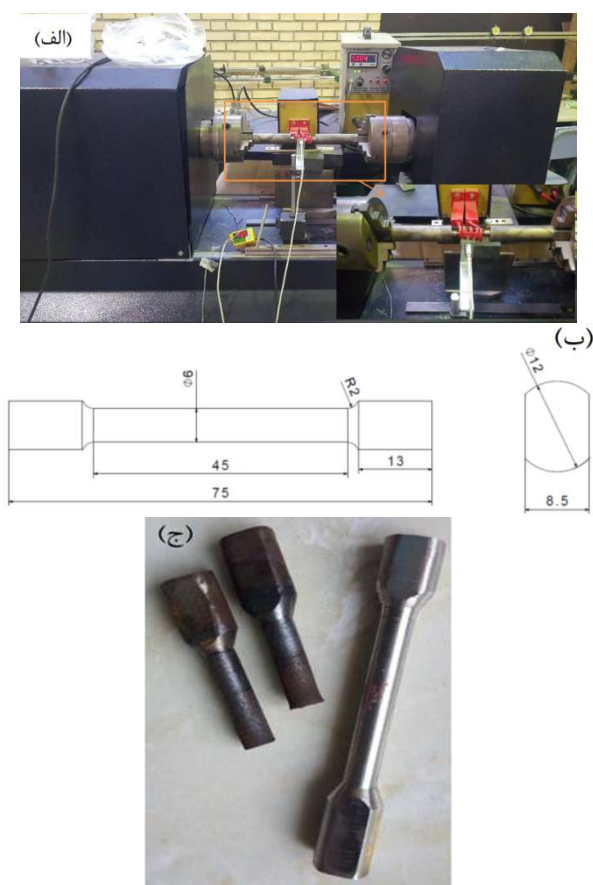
Experimental set-up. (a) Test machine; (b) Dimensions of the test specimen according to ASTM E8 standard; (c) test specimen
